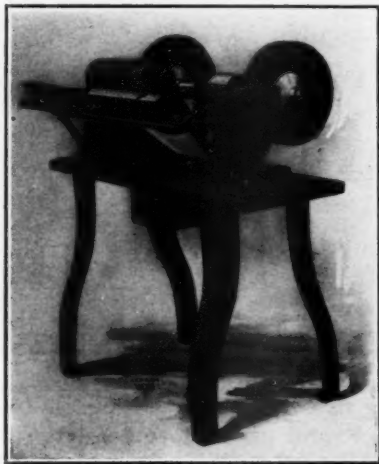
WADSWORTH CUTTING OFF AND CONING MACHINE.
